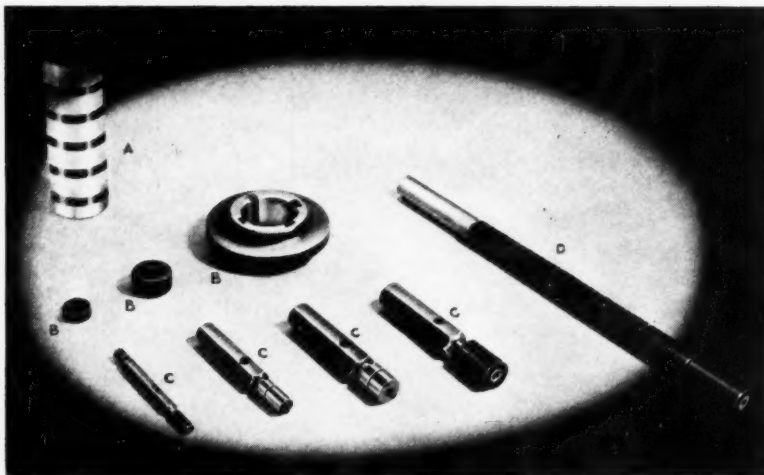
Ring and Plug Gages Made with Inserts, Rings, or Bushings of Tungsten Carbide to Obtain Long Life
